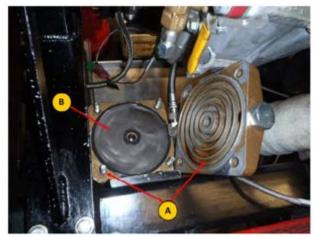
Disassembled Oberg Filter Housing (A) with filter element (B)
